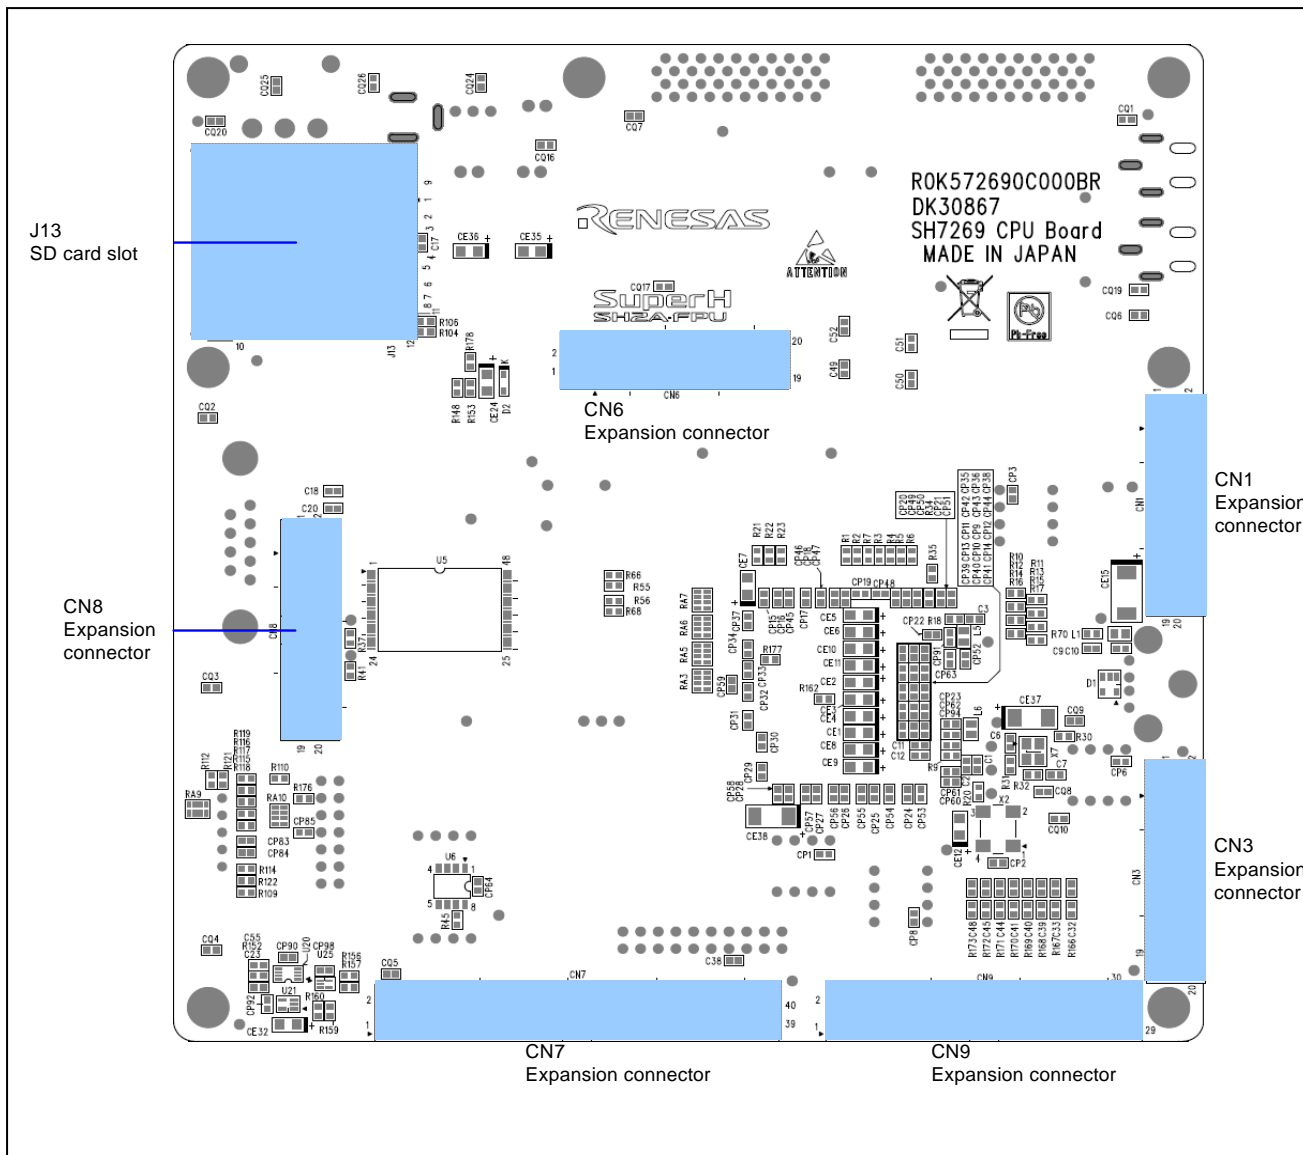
R0K572690C000BR Connector Assignments (Top view of the solder side)
